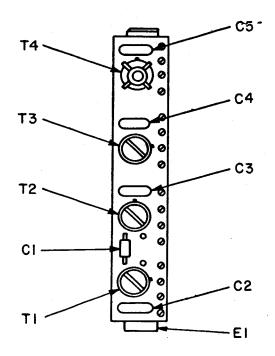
16 MHz Subassembly A2A4A6, Component Locations
